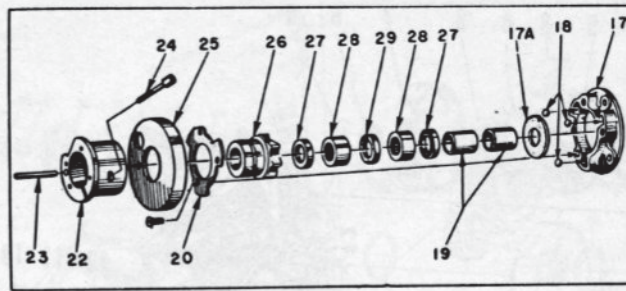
Exploded view of Homelite ball drive starter for model 775G. Starter for model 775D is similar except it is designed for counterclockwise rotation. Tension screw (24) should be adjusted so that hub (22) will drive ratchet (26) to crank engine, but ratchet will slip in hub if engine kicks back. Torque transmitted through hub and ratchet can be measured by locking engine, removing two opposite screws (41) from pulley and turning pulley with special key (Homelite tool No. A-22224) and inch-pound torque wrench. Torque should be 170-180 inch-pounds.
